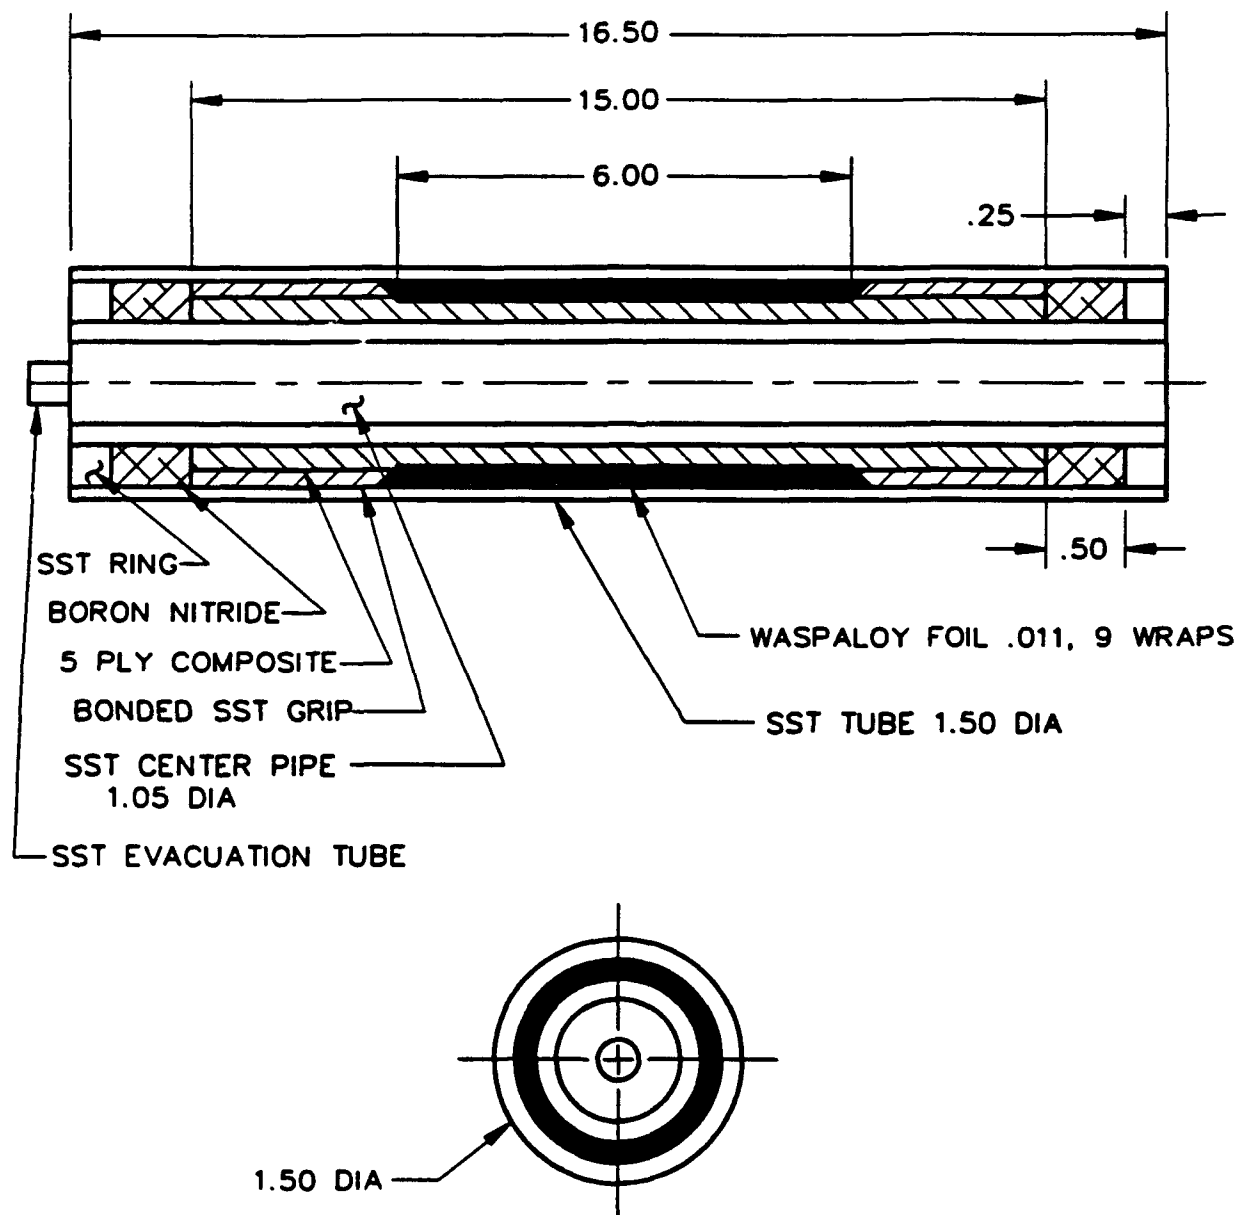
Tube No. 1, Extensometer Socket Pad Specifications.
